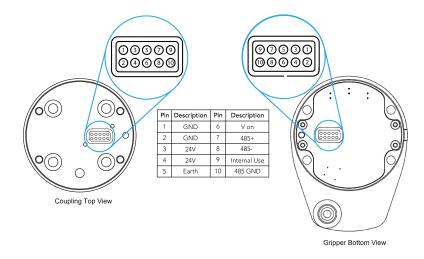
Pinout of the cable-to-wrist coupling.
